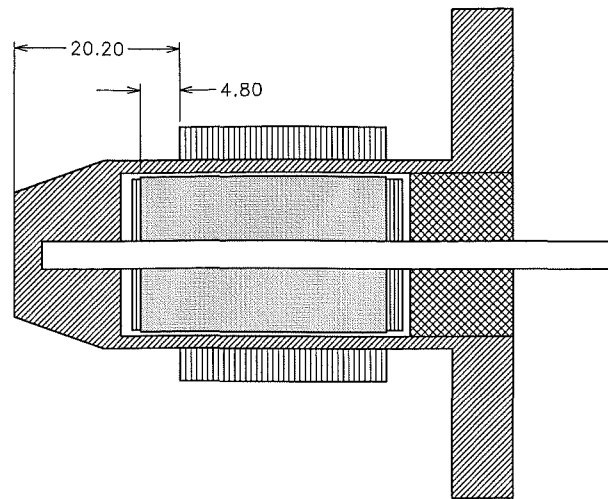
Section through the stator d-axis of design B. Dimensions in mm.
